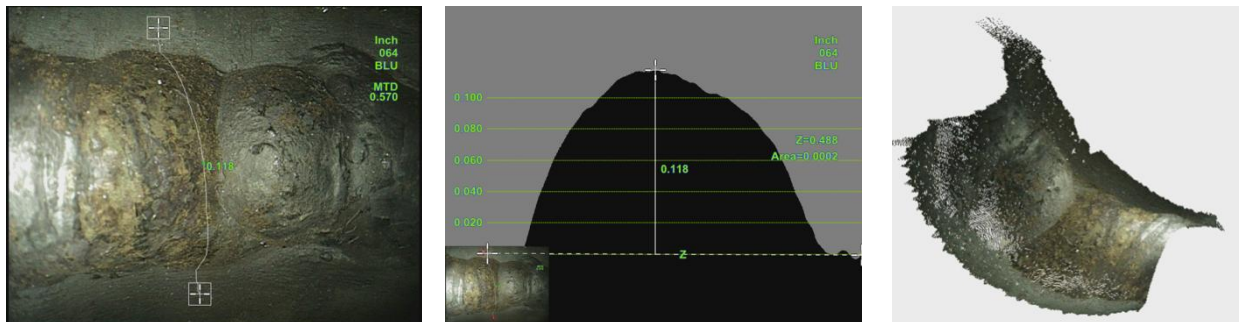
3D scan and profile measurement of a weld bead (left)
